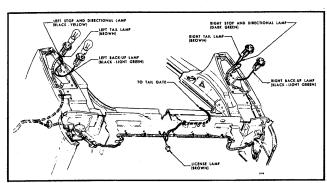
Rear Cross Bar Wiring - Chevrolet "X" Bodies
